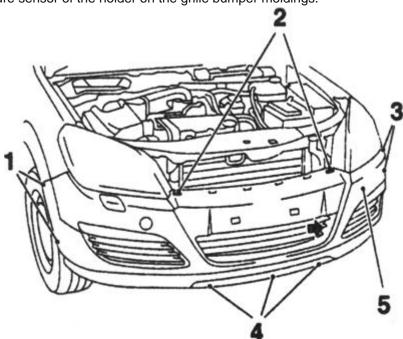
Mounting pads front bumper Car Opel Astra:
